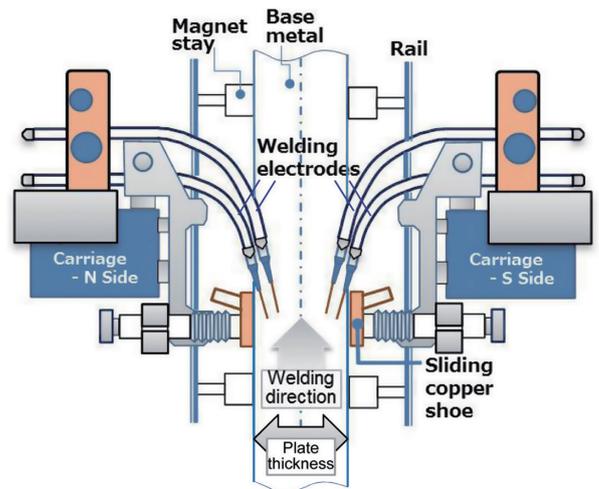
Schematic diagram of four-electrode VEGA® welding process
